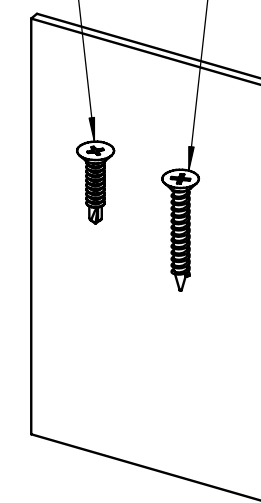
INSTALLATION (EXPLODED VIEW)
